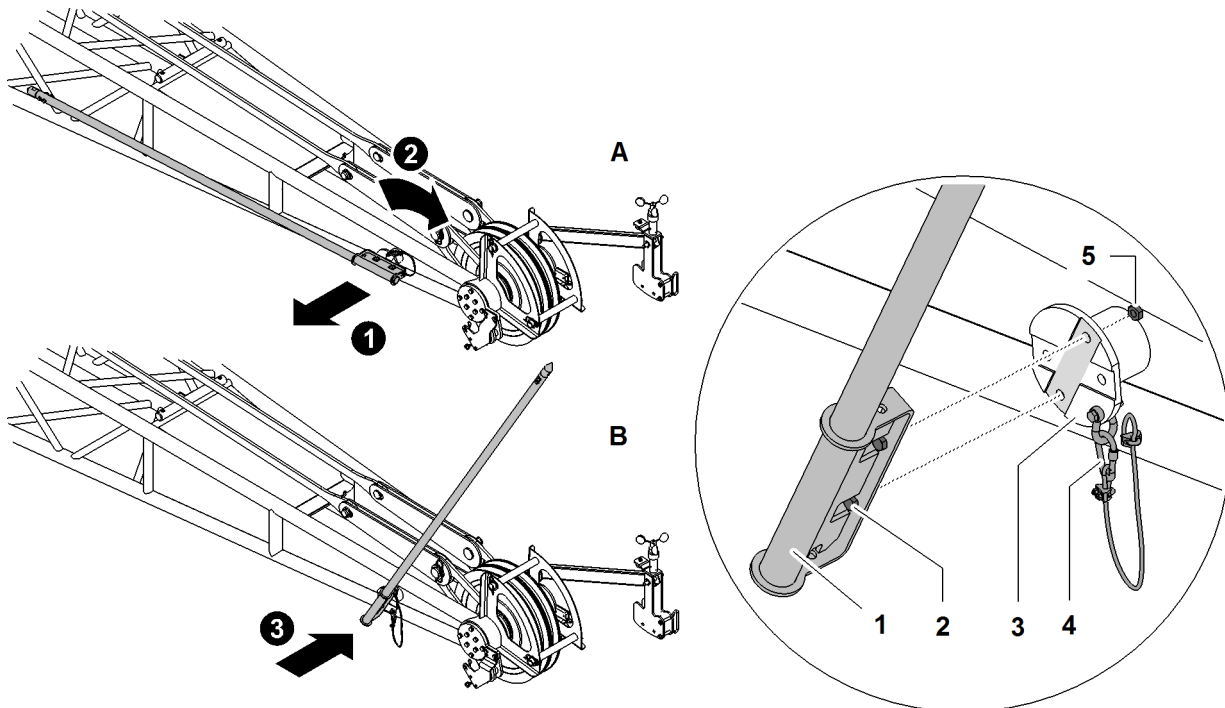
Moving the lightning rods\* on the fixed jib head into working position (illustration of principle)
